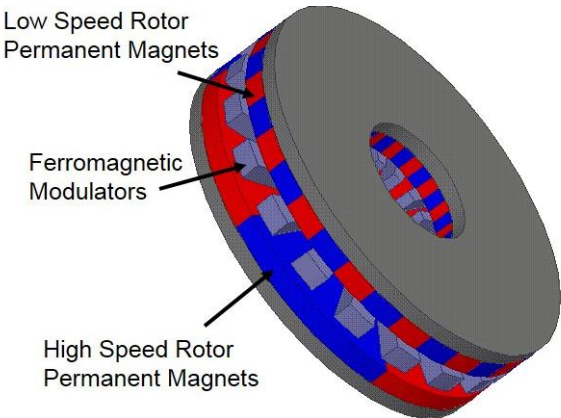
Axial Flux Coaxial Magnetic Gear with Surface Permanent Magnets
